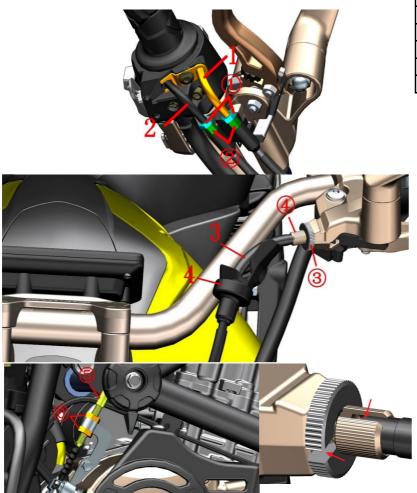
FRONT FORK COMPONENT		Throttle/clutch cable clearance adjustment	CHK
